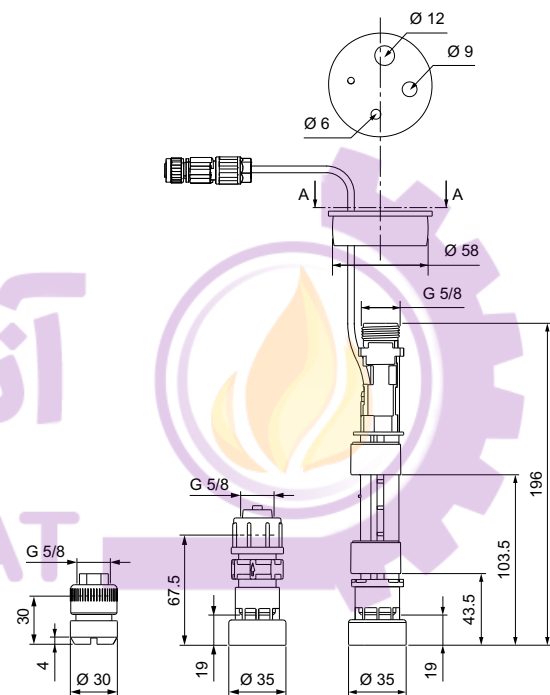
Left: stainless-steel foot valve; centre and right: PE or PVDF foot valve, dimensions
